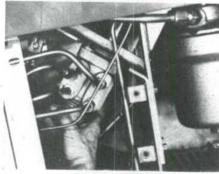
Left side panel removed showing removal of hydrostatic hand pump.
